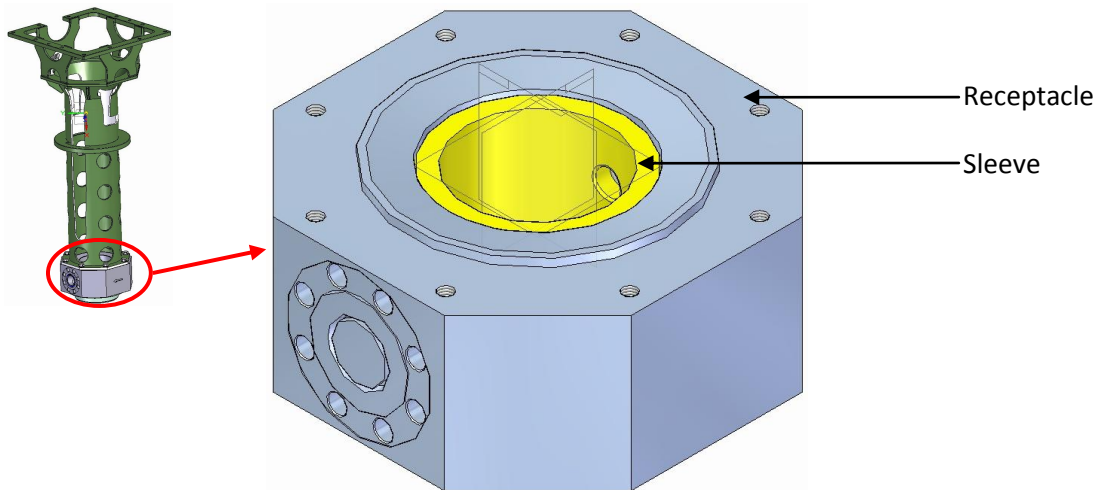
Detail view of receptacle and sleeve. Bolt holes on top are for mounting the funnel.
